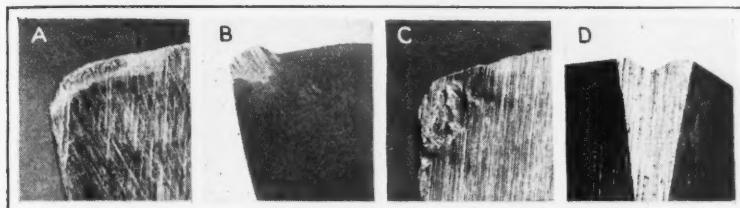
A Shows the Formation of a Pinnacle Back of the Cutting Edge; Cross-section at B, the Height of the Pinnacle; C, the Crater Formed after the Pinnacle is Broken off; and Cross-section at D, Depth of Crater
